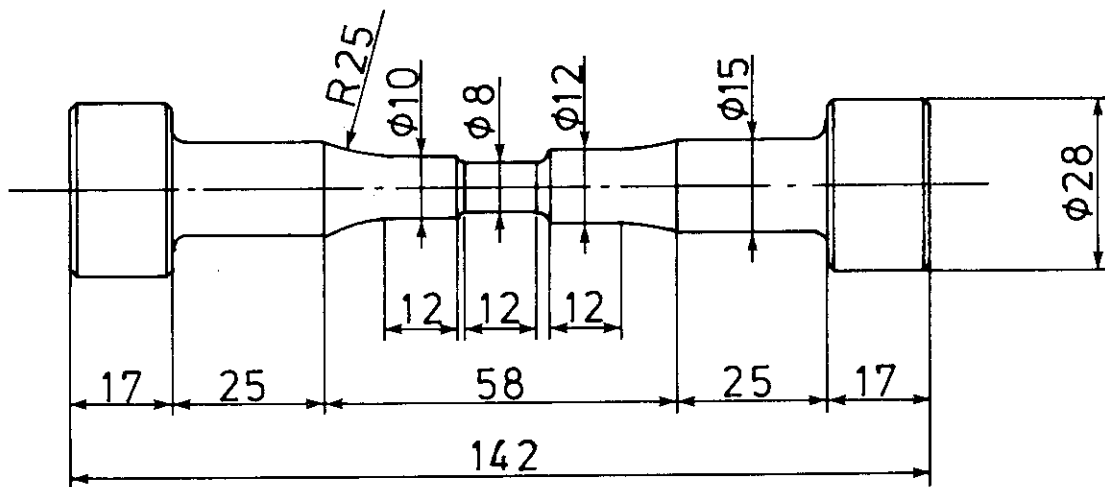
Geometry of specimen. (special multiple diameter type specimen, unit : mm)
